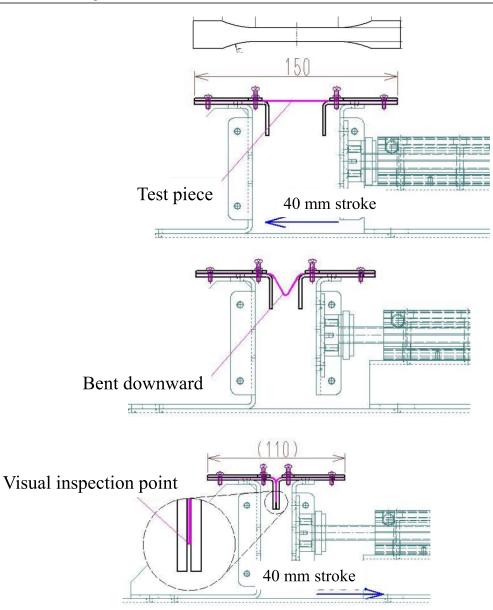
Bending test machine operation and test piece visual inspection point.
